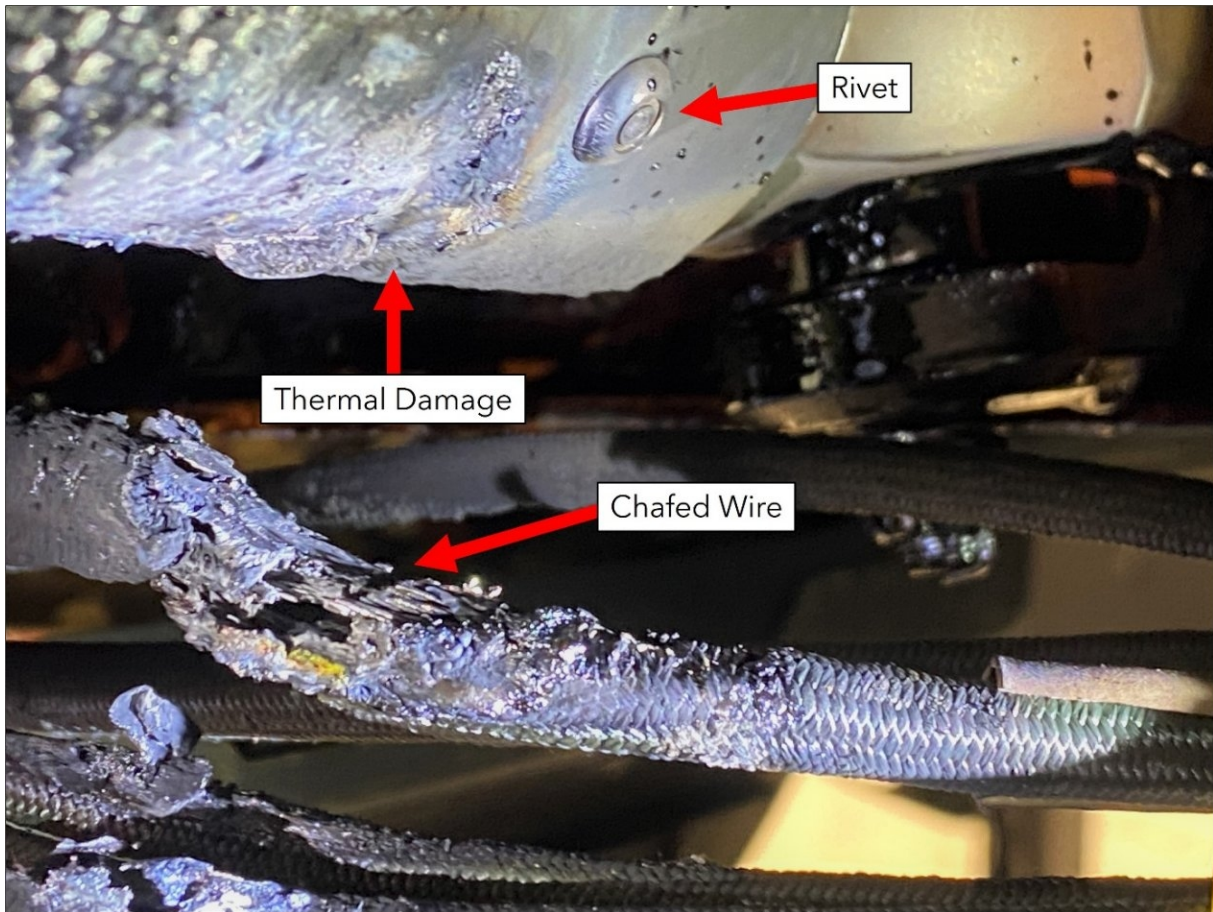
Chafed wires and thermal damage to C3 collective torque tube
